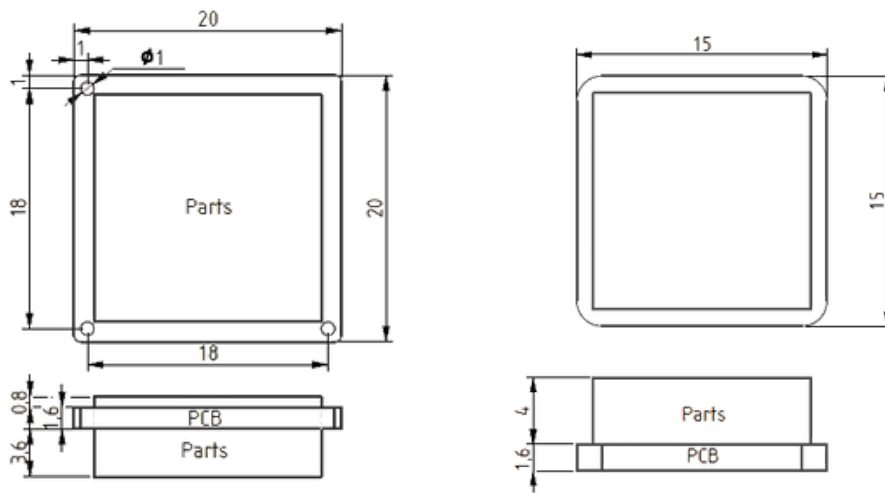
AGM-210 External Dimensions (Unit: mm)
